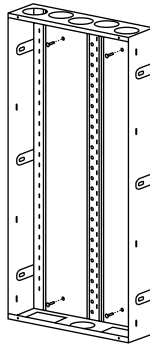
Tightening mounting screws after aligning mounting holes with pilot holes.
